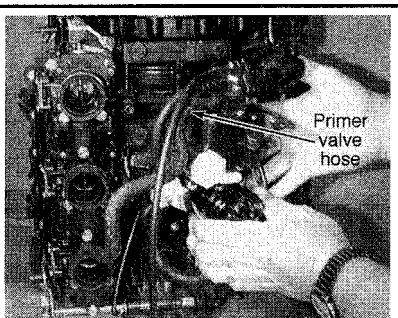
Remove the screws and then tilt the bracket assembly for access to the rear primer valve discharge hoses
